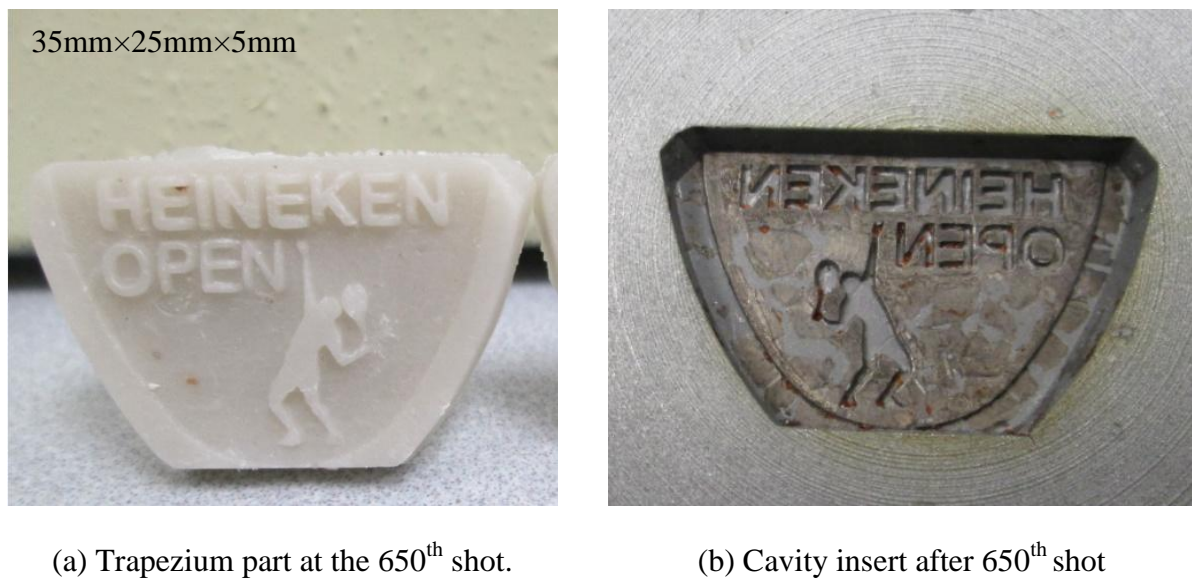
A trapezium part produced by the mould built by rapid tooling.
